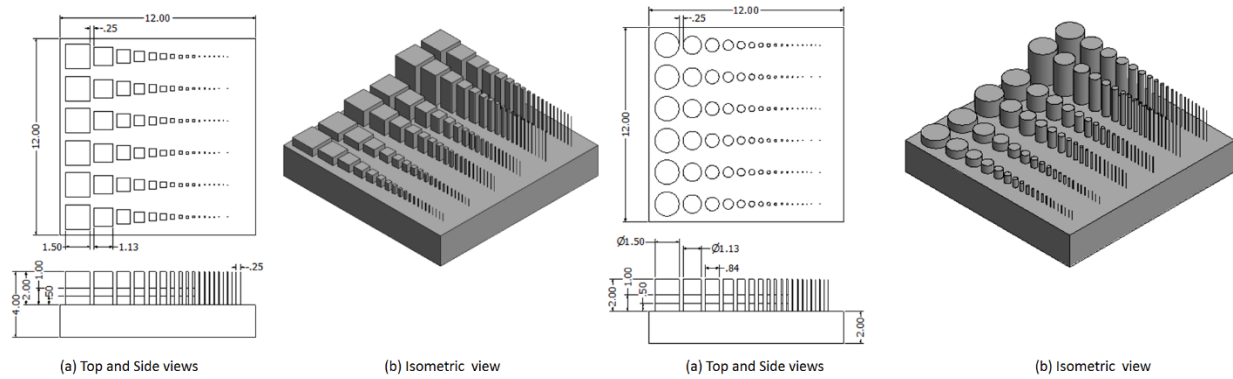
Drawing of the test part (a) Top& side views and (b) Isometric view (dimensions in mm)
